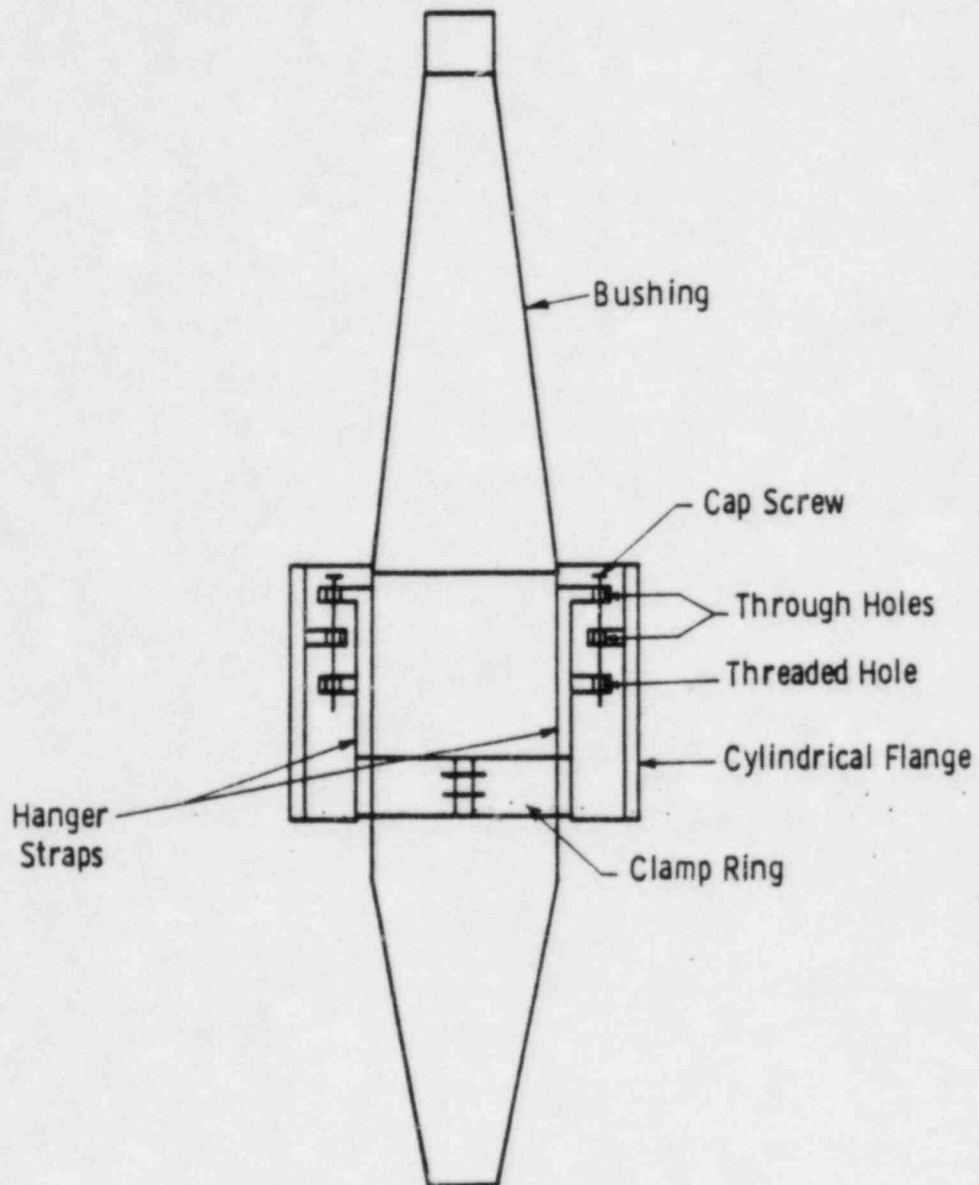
Schematic sketch showing the location of the two cap screws in the bushing support assembly. Not to scale.
